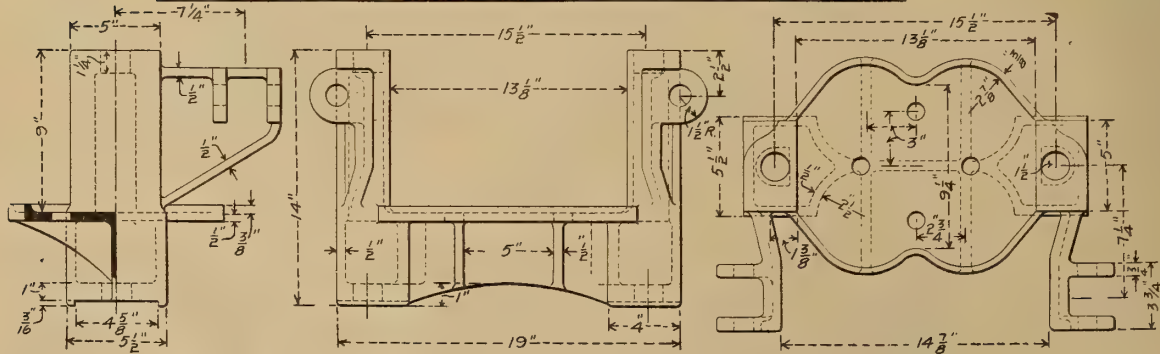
CAST STEEL TRUCK BOLSTER. AMERICAN STEEL FOUNDRIES, MAKERS.
